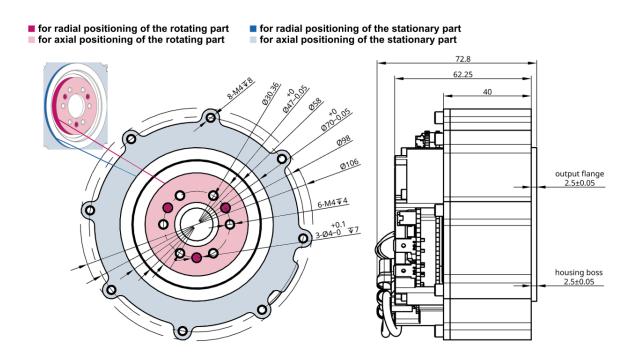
AJD-10-60-195-ECS1xx mechanical interfaces
